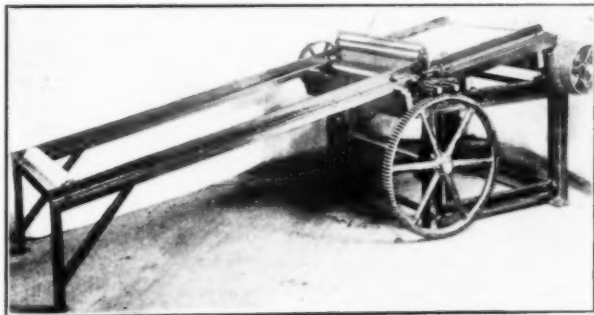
AUTOMATIC TRIMMING AND WRAPPING MACHINE.
